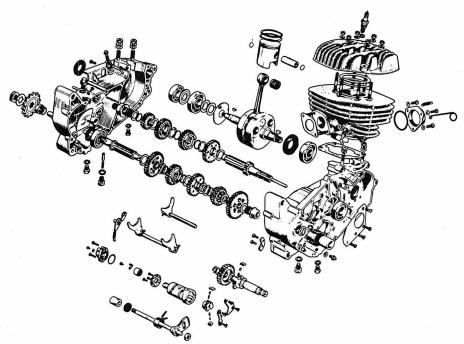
Exploded view of T\$ 250 engine and transmission assembly. Minor differences may be seen between this unit and T\$ 250 R model.
